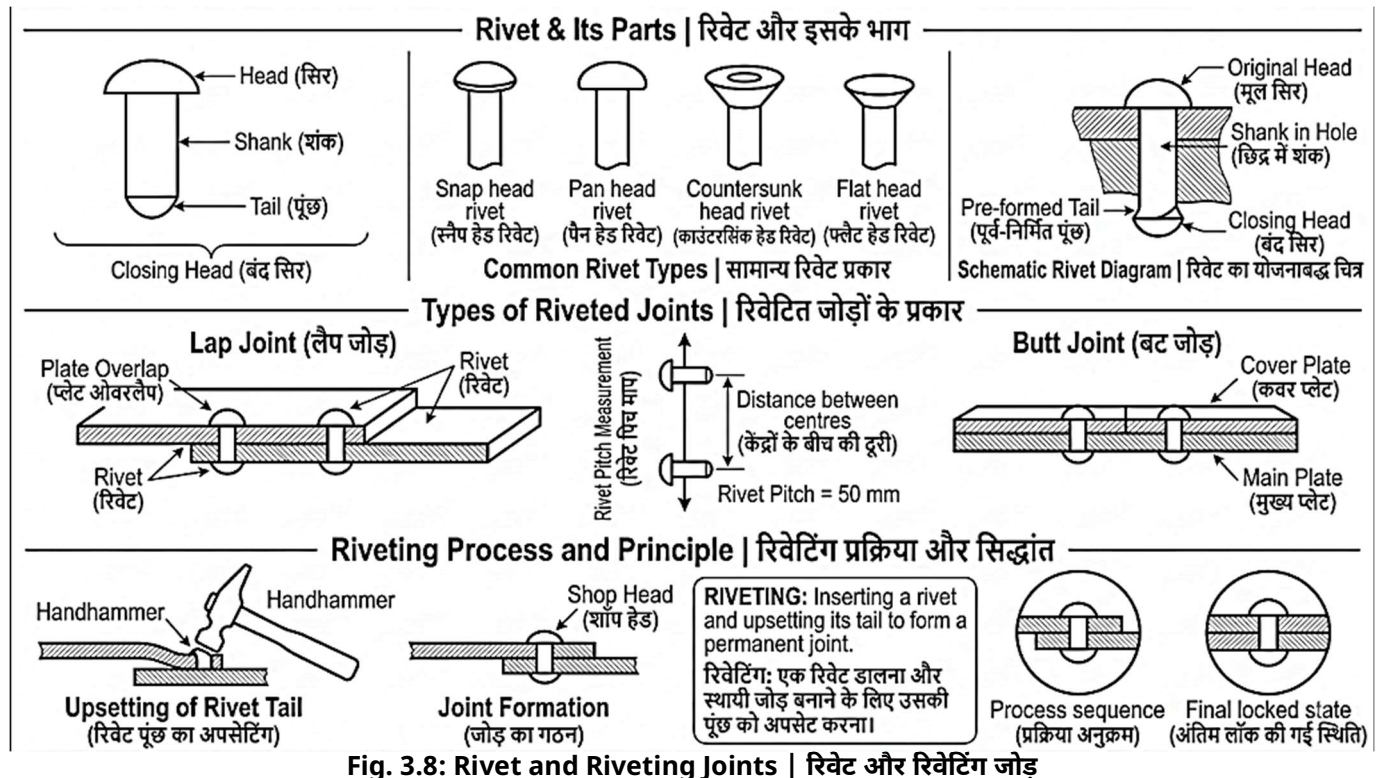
Rivet and Riveting Joints | रिबेट और रिबेटिंग जोड़
